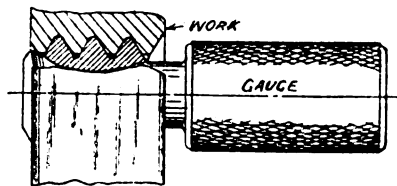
Showing Clearance at Bottom of Spaces in Plug Gauges to clear Flat Tops of Work Threads
